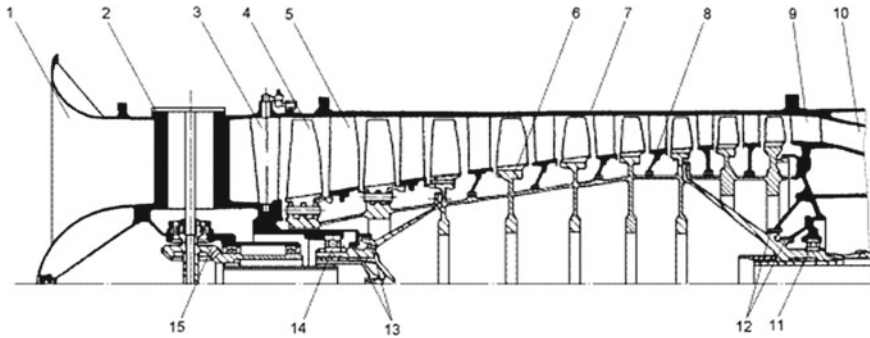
Multistage axial compressor of gas turbine engine. 1—inlet casing; 2—front casing; 3—inlet guide vanes; 4—blades; 5—guide vanes; 6—compressor rotor; 7—main casing of the compressor; 8—interstage radial seal; 9—exit (outlet) guide vanes; 10—rear (exit) casing; 11—rear bearing; 12—seals of the oil cavity of the rear bearing; 13—seals of the oil cavity of the front bearing; 14—front bearing; 15—drive of the front gearbox
